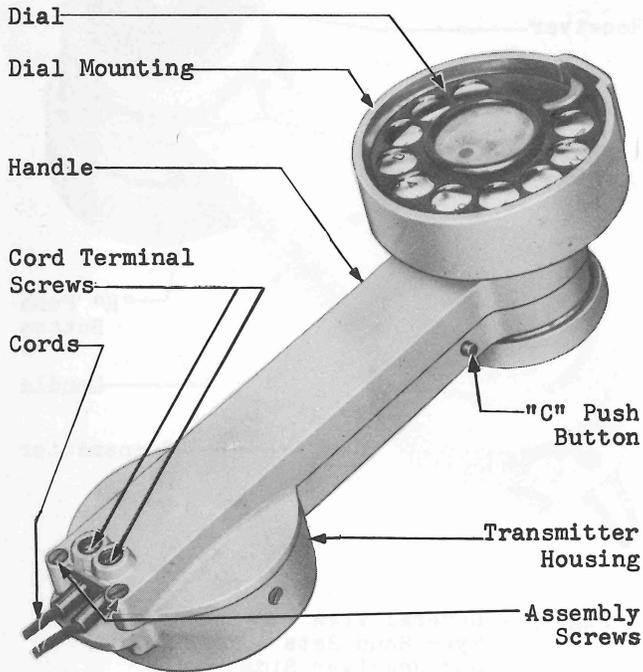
General View - D-Specification Type Sets - Dial Side
